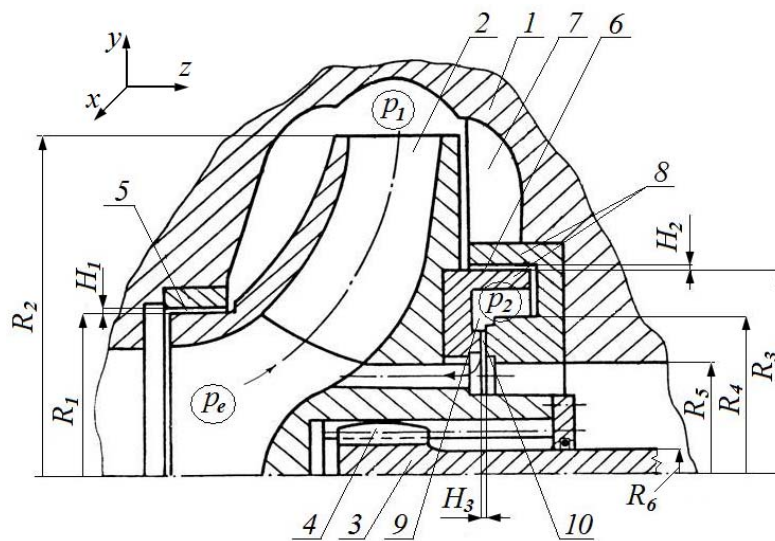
Geometry of the impeller with a balancing device: 1- pump casing, 2- impeller, 3- shaft; 4 – ball joint; 5, 6 – longitudinal seals of the impeller; 7 – radial vanes; 8- liner disks of balance device; 9 – annular chamber; 10 – lateral (face) clearance.
